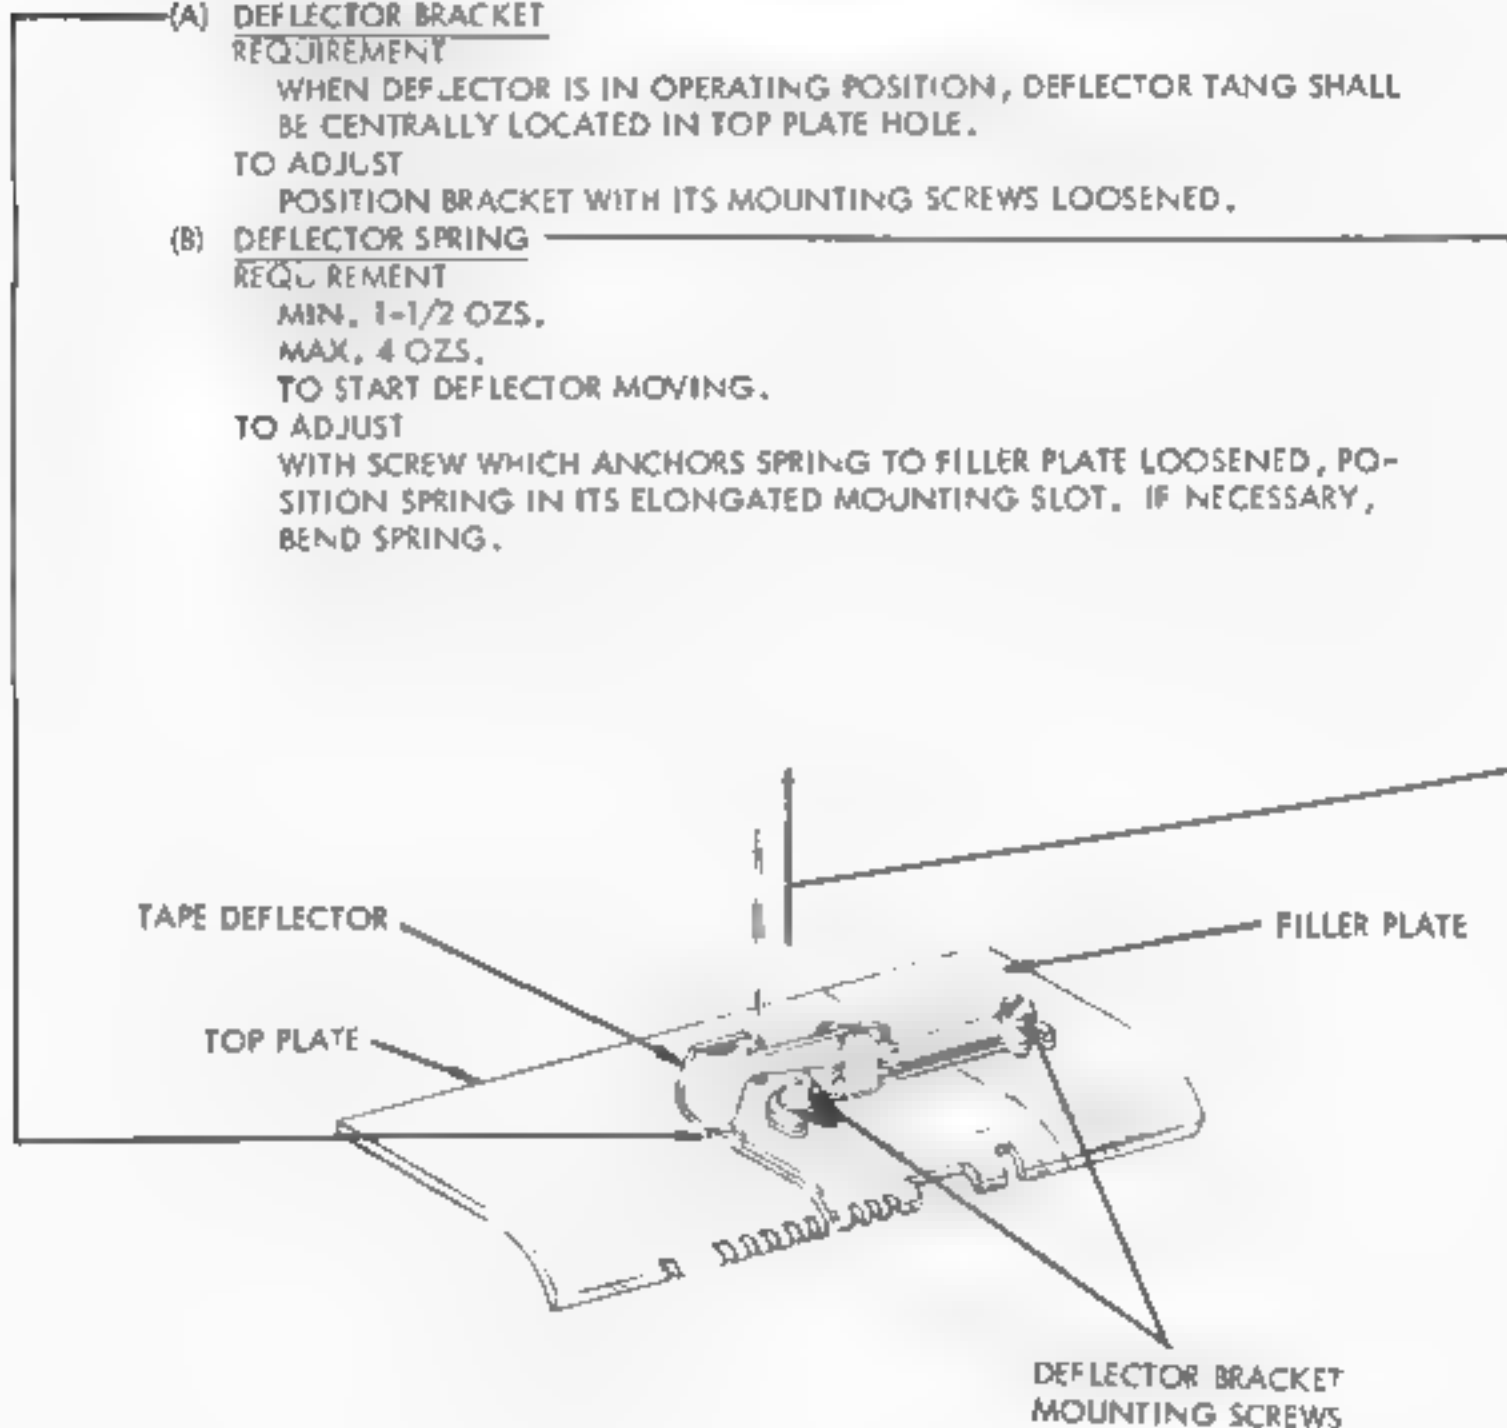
TAPE DEFLECTOR MECHANISM
